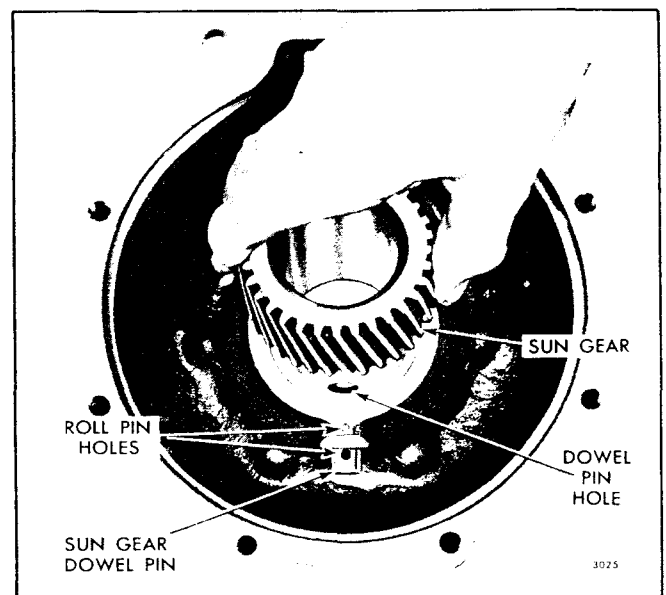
Installing Sun Gear in Reduction Gear Housing (1.5:1 Ratio)
